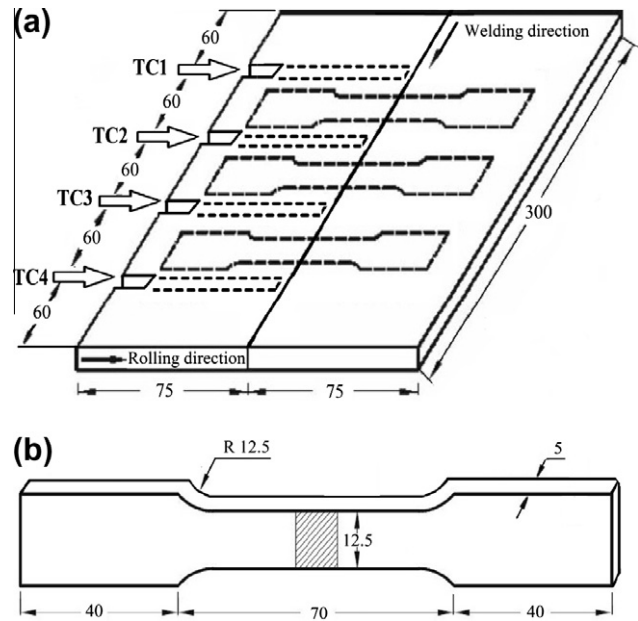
Schematic illustration of: (a) tensile specimens and thermocouples positions in the workpiece and (b) dimensions of tensile test specimen.
